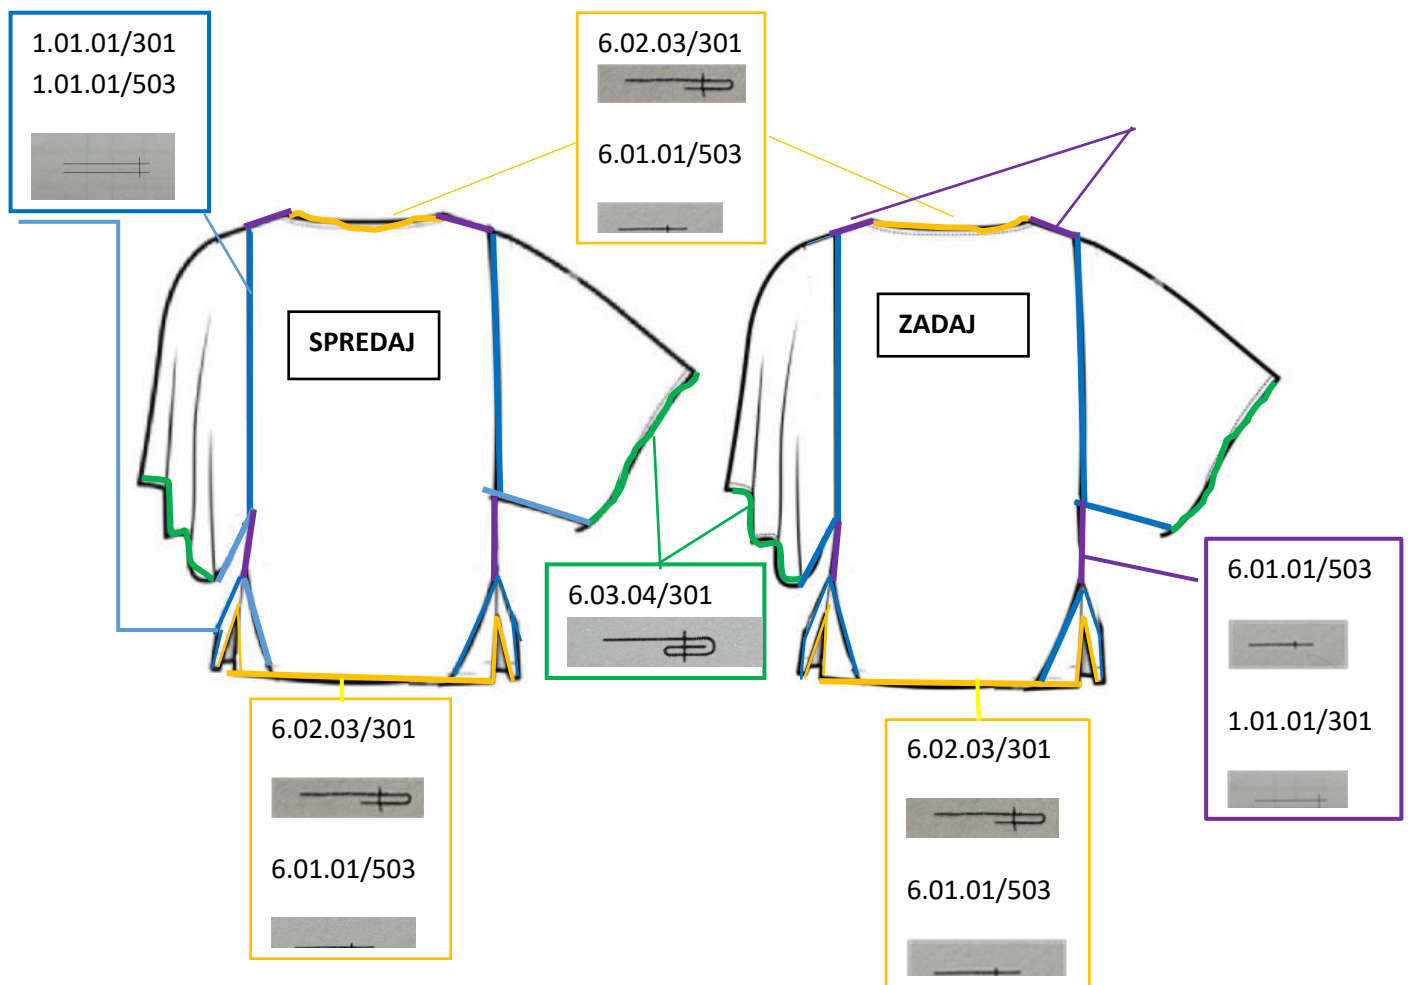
Technical sketch of the tunic with all used stitches and seams.
